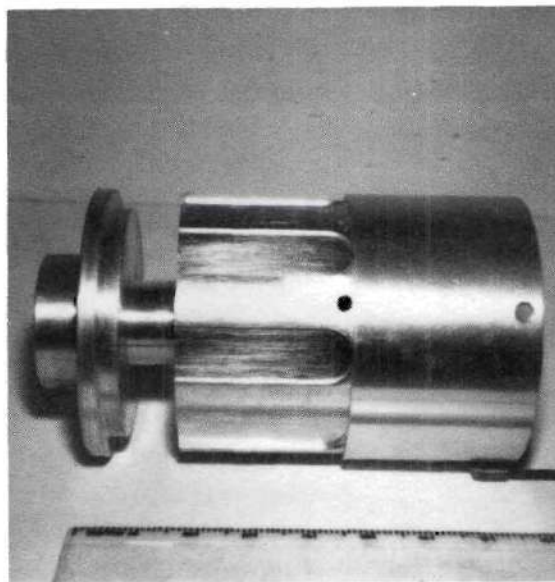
Rotor-Stator Assembly GTRR In-Core Pile Oscillator
